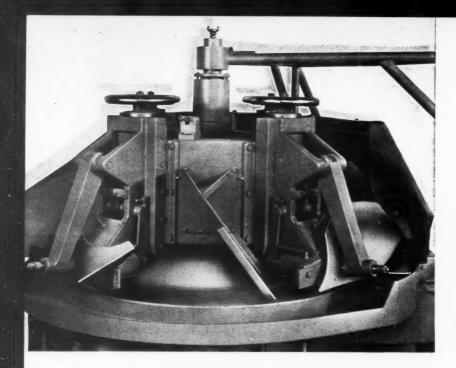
Vertical-spindle disc grinder equipped with a four-station, rotary work-holding fixture for grinding the edges of plowshares
